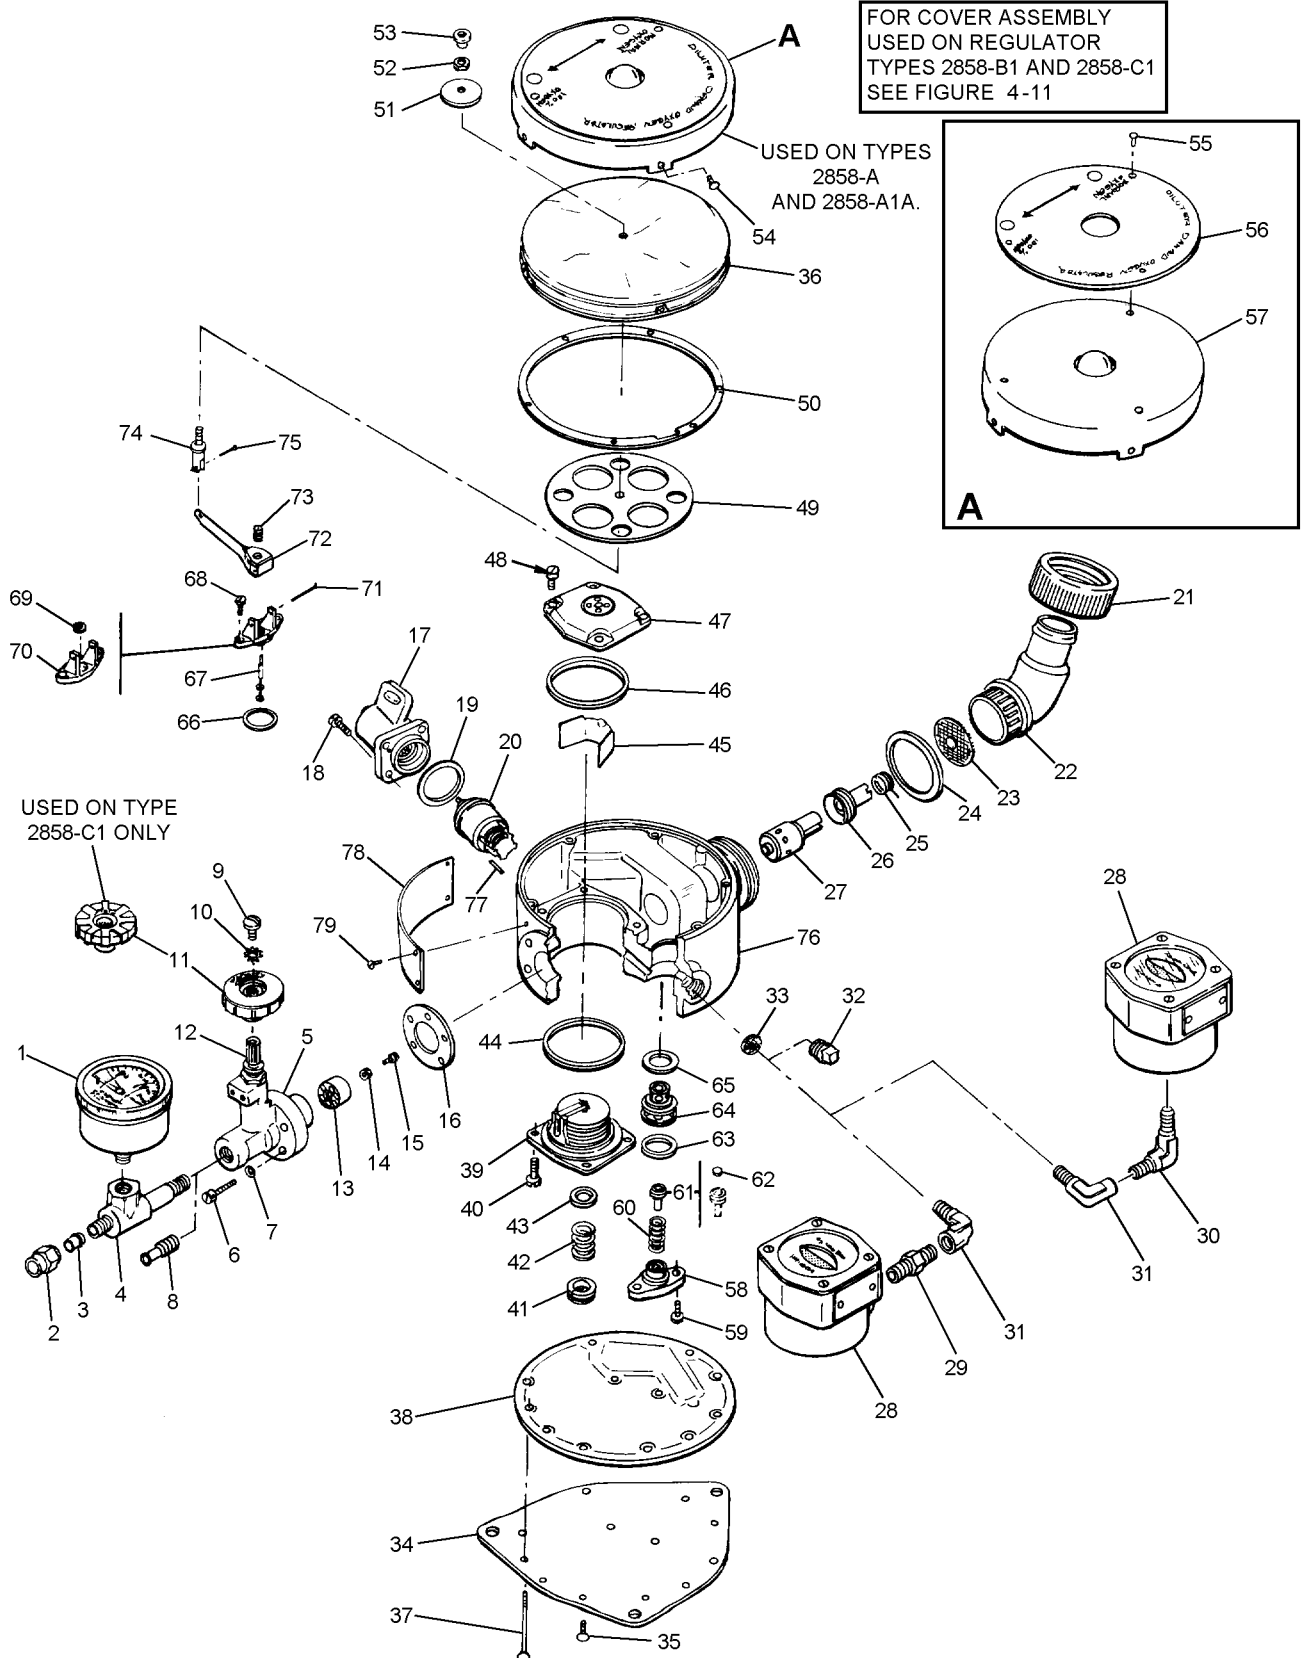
Diluter Demand Oxygen Regulator Assembly
